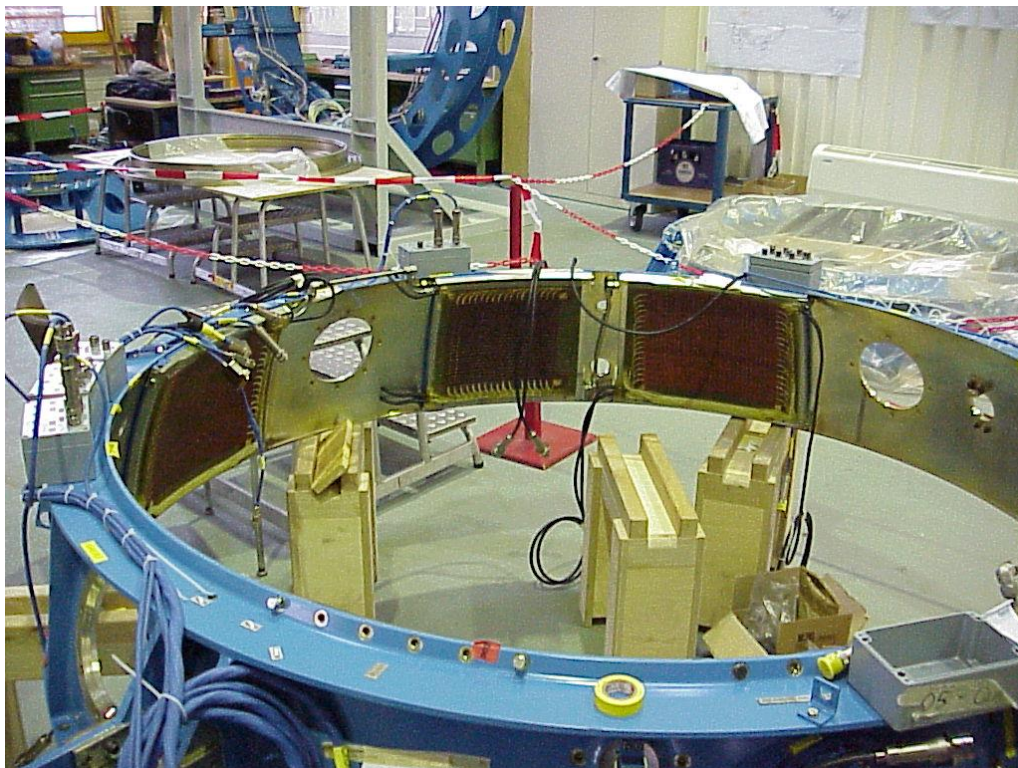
Back in the assembly room, many more components of the SUA being prepared for assembly – November 2001.
